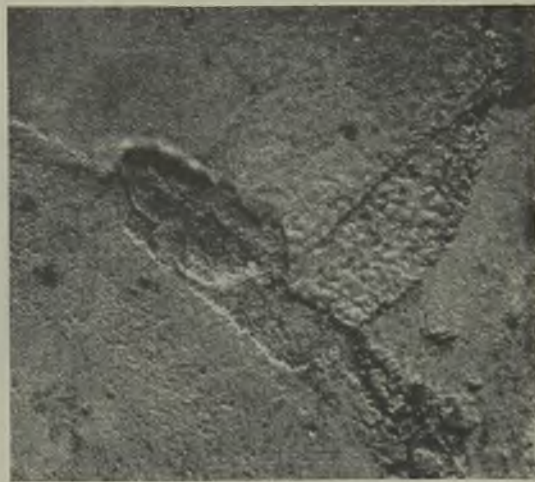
DEFECT CAUSED BY SOFT RAMMING.
